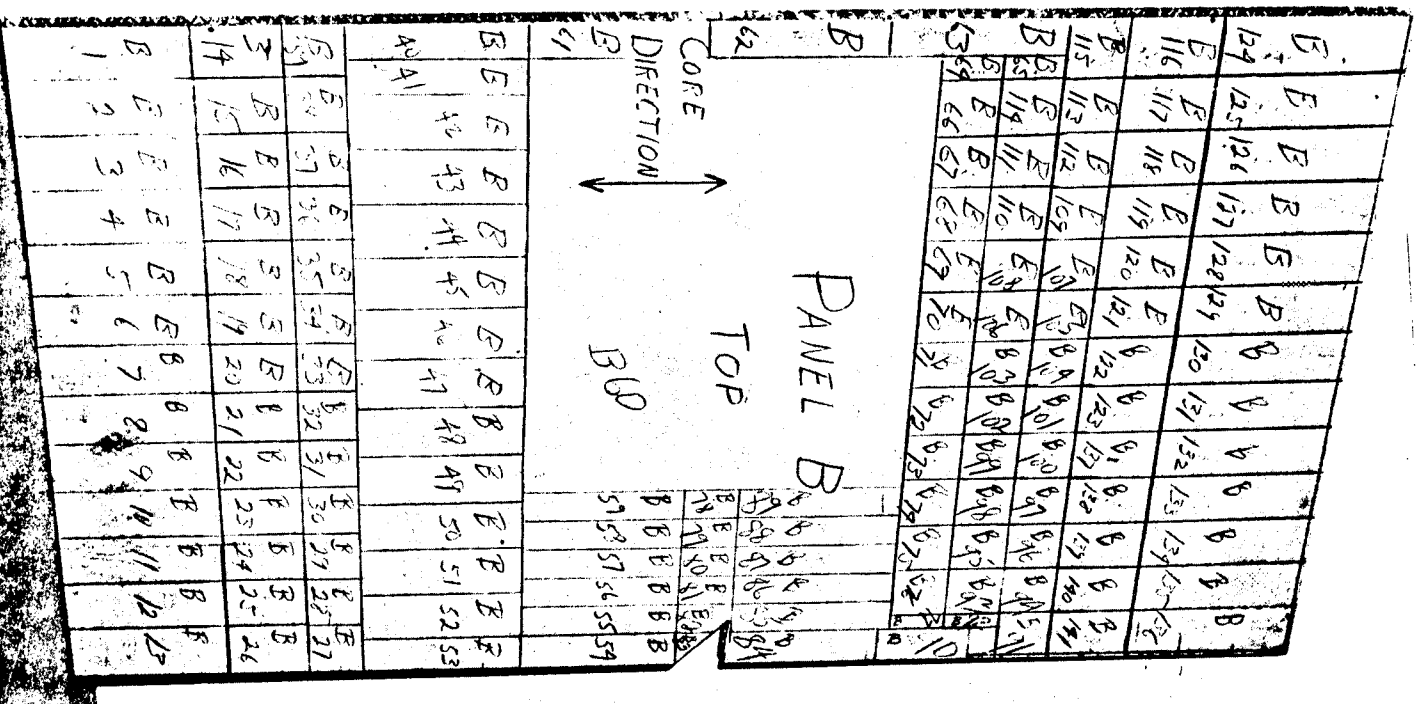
Lay-out of Test Specimens on Panel B. Panel B had X7106 Faces, 6951 Core and 716 Brazing Alloy. It was Brazed in a Flat Blanket Brazing Die.
